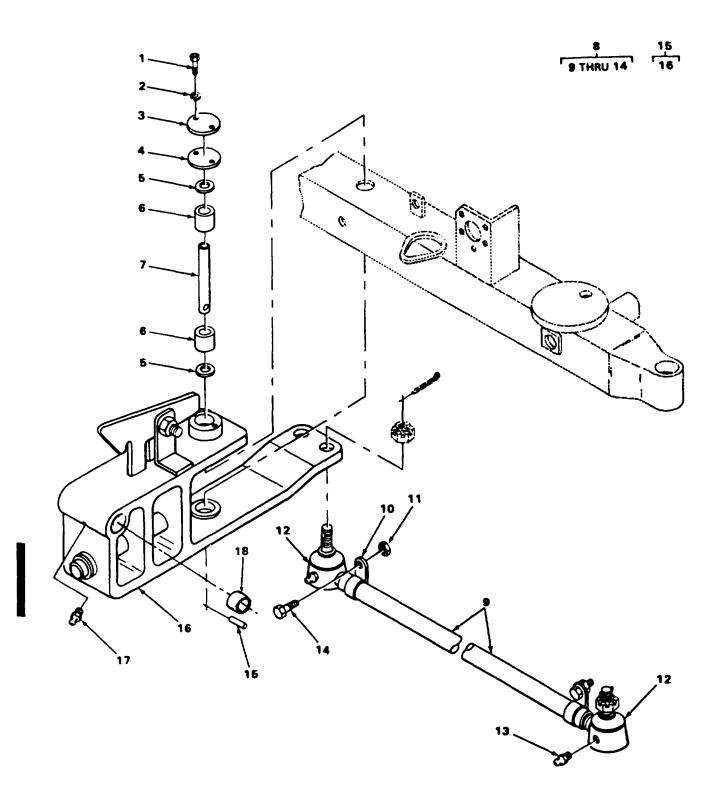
STEERING ARM AND TIE ROD ASSEMBLY.
